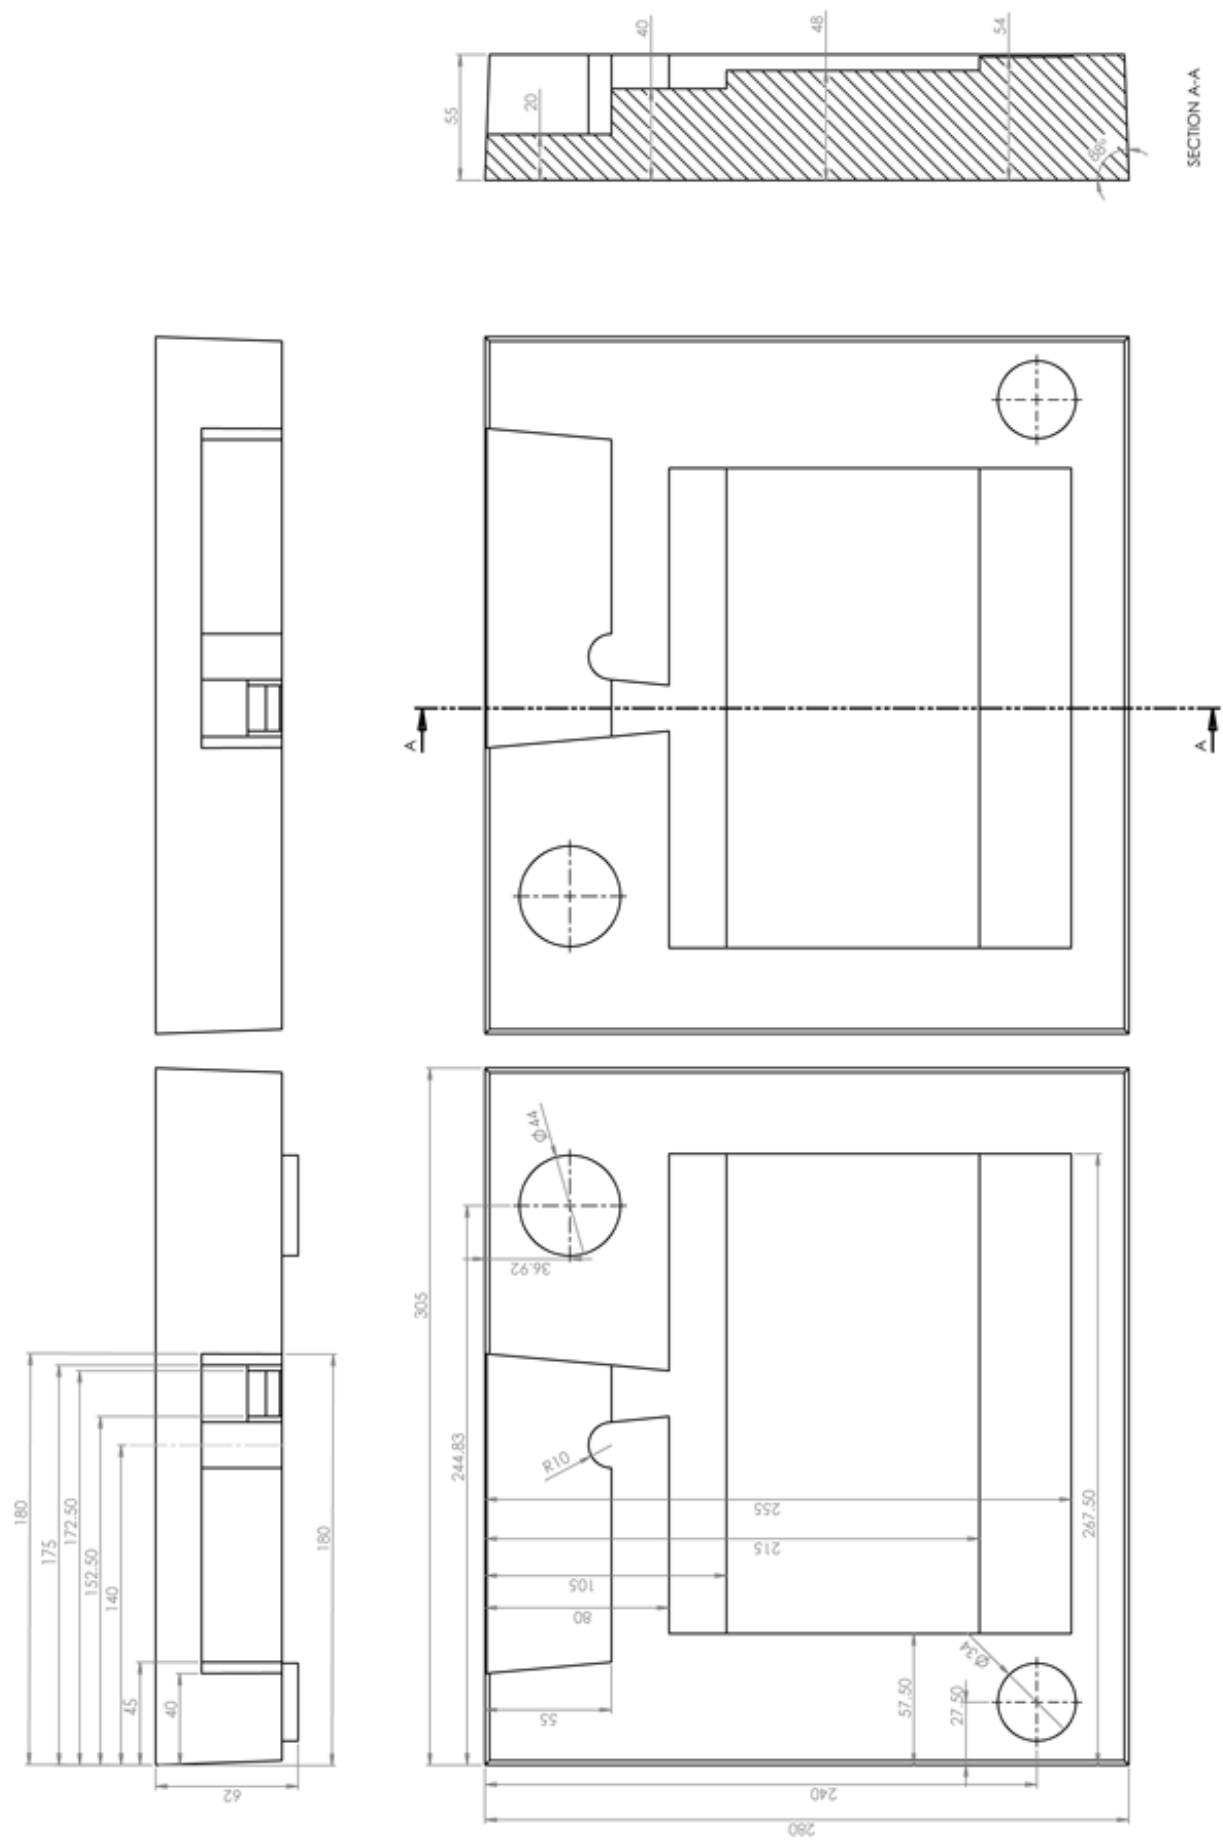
, dimensions of the mould used for the casting process, unit: mm.
